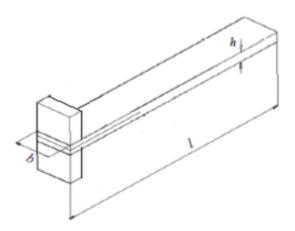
Sketch of Double Cantilever Beam (DCB)
